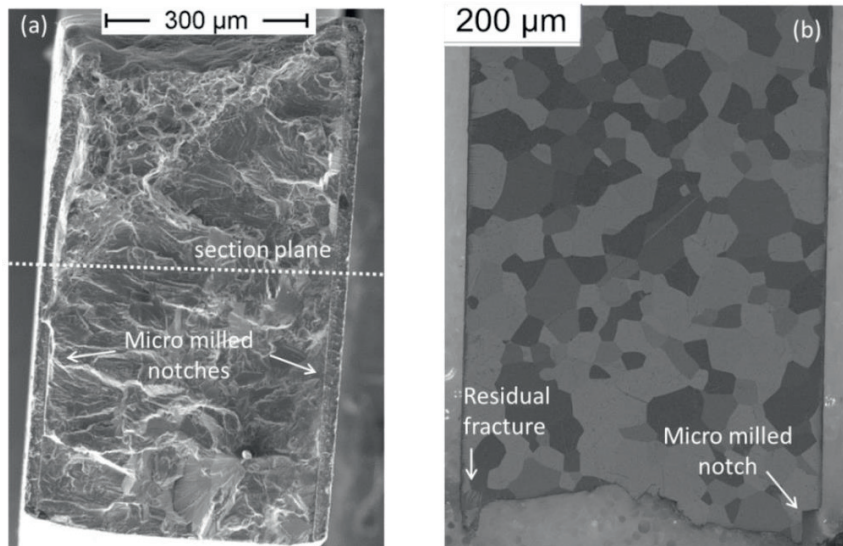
Fracture Surface (a) and microsection (b) of specimen D (micro milled 20 μm)
